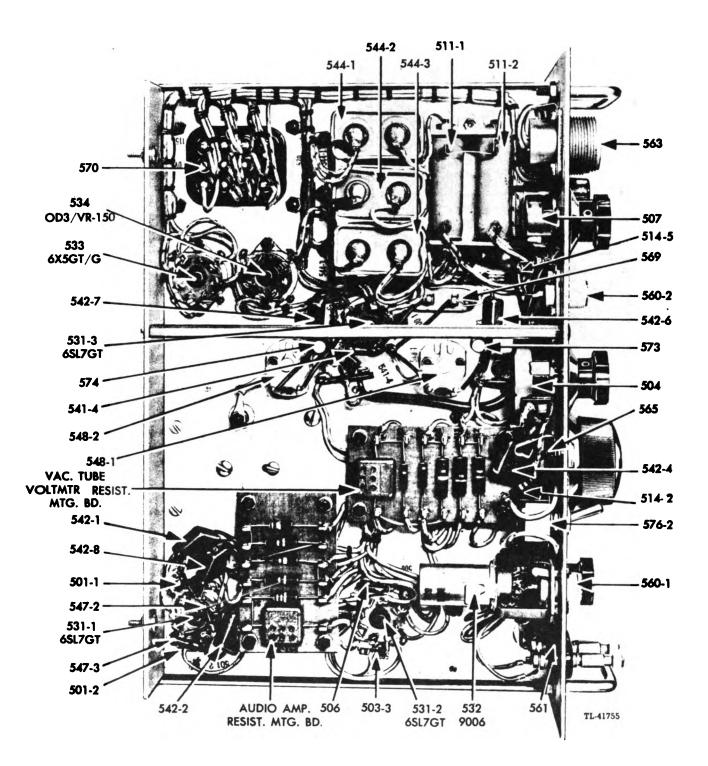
Test Set TS-159/TPX, bottom view, cover off.
